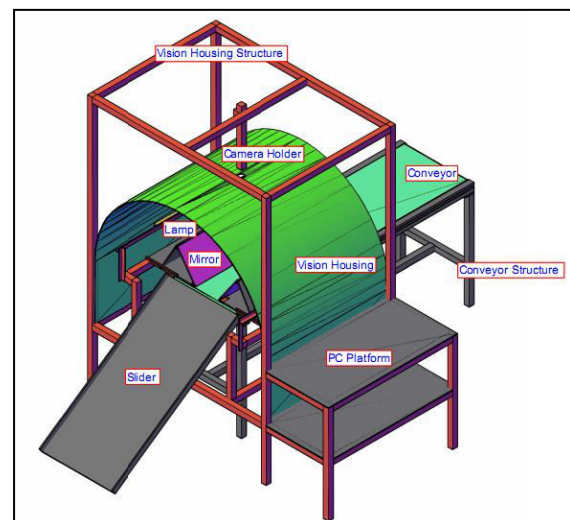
The 3D drawing of the star fruit inspection system.
